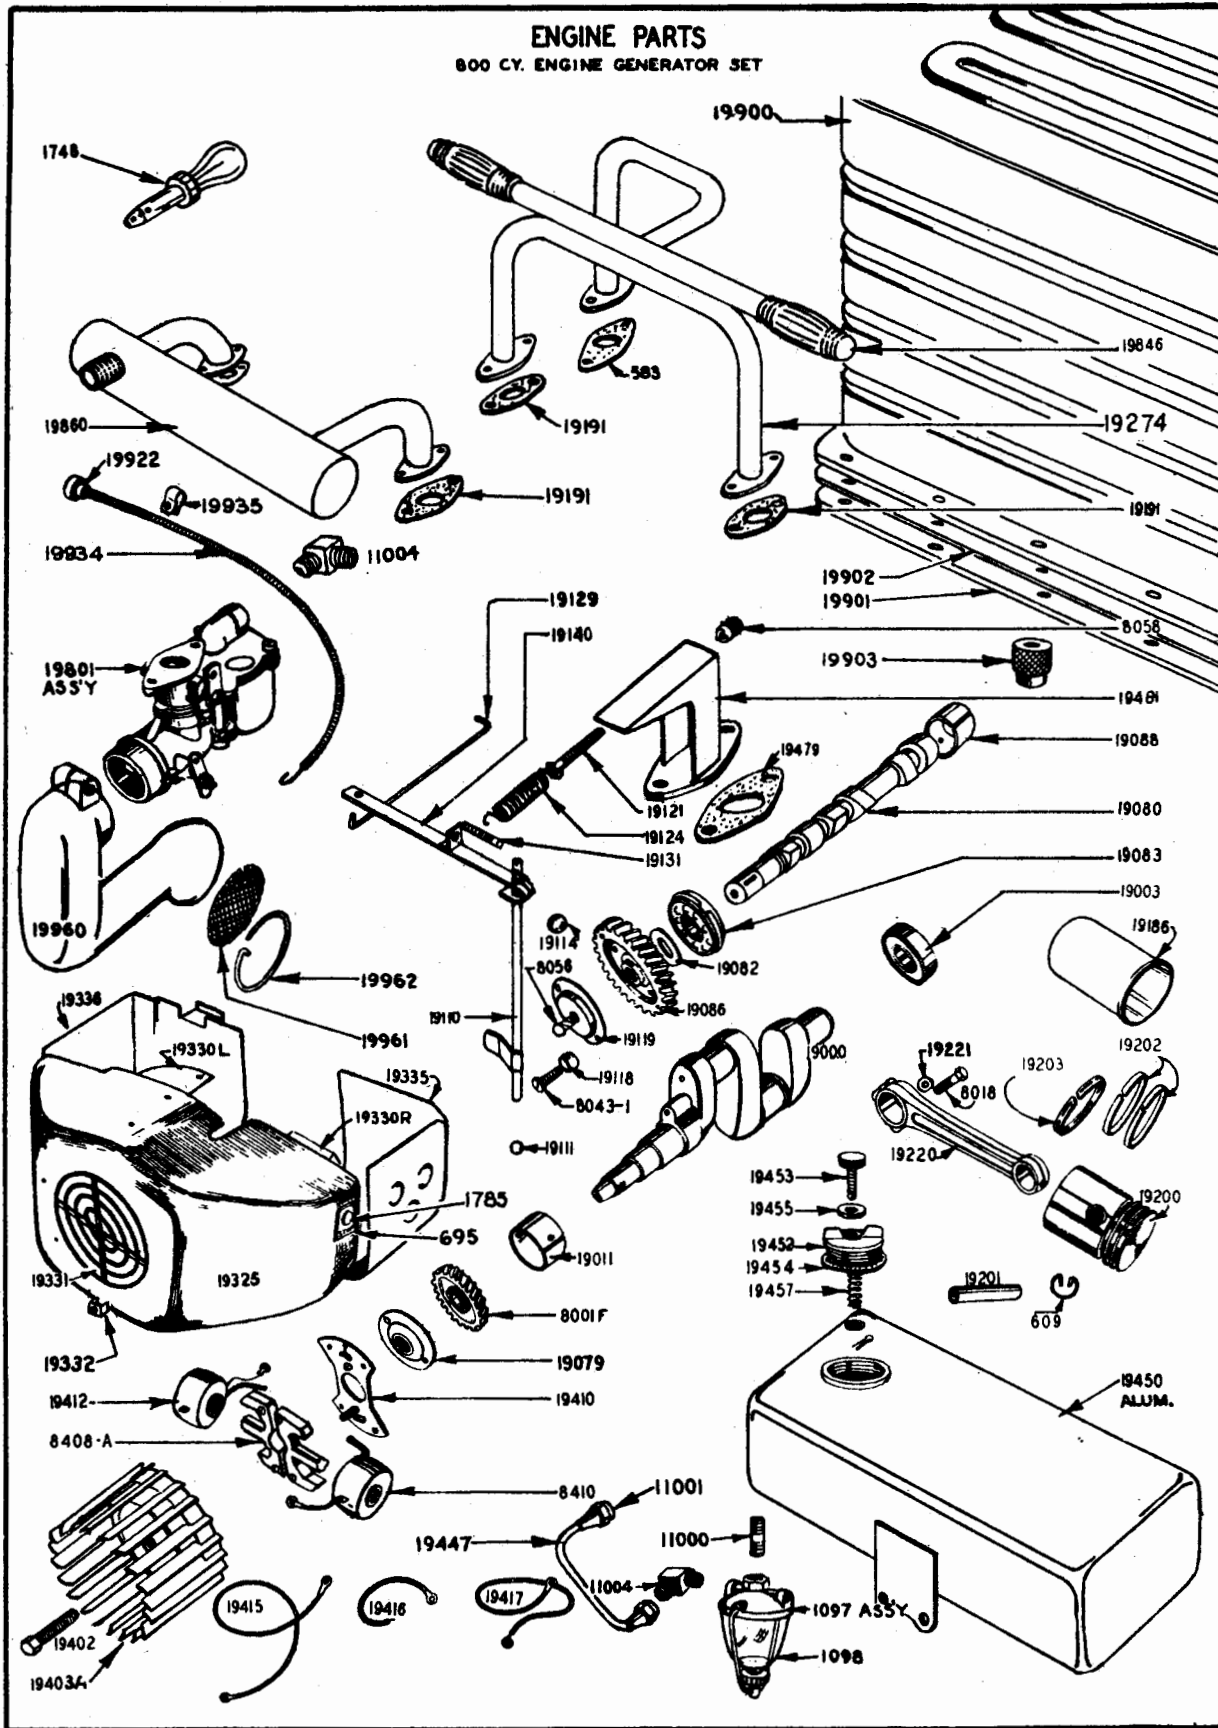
Engine Parts—Detail Components for Engine Generator Set Type CDO-73004
